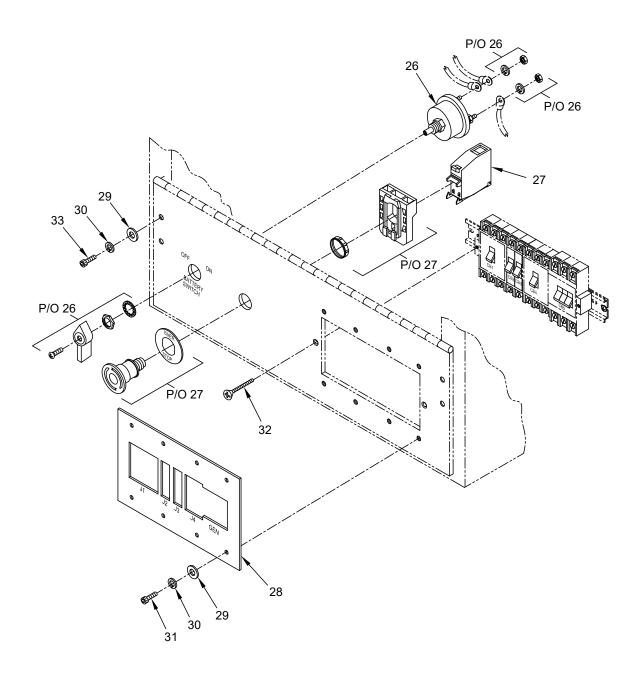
Control Panel Assembly (Sheet 4 of 4).
